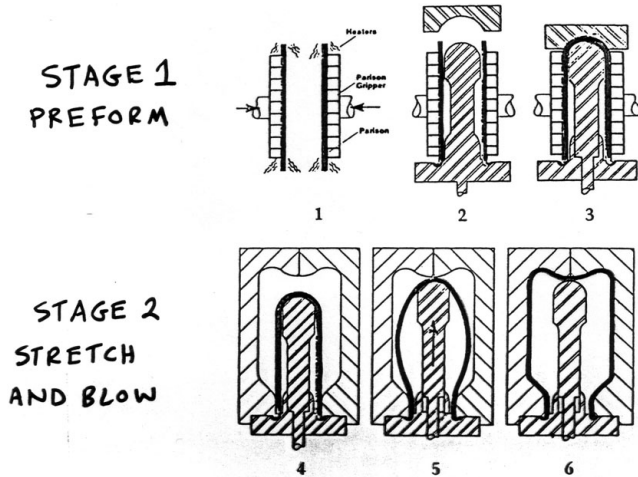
Cold tube process, product forming steps. (1) Precut cool pipe length is heated. (2) Neck finish is die formed. (3) Bottom end is closed. (4) Preform in stretch blow mold. (5) Forming mandrel produces axial stretching. (6) Blow air produces hoop stretching.
